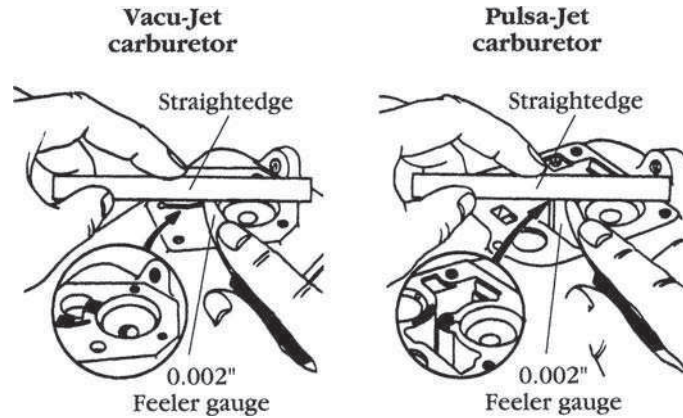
Vacu-Jet and Pulsa-Jet tank flanges are crucial. Hairline cracks or low spots leak fuel. A low spot in the shaded area shown, denies vacuum to the Pulsa-Jet fuel pump. Briggs & Stratton Corp.
